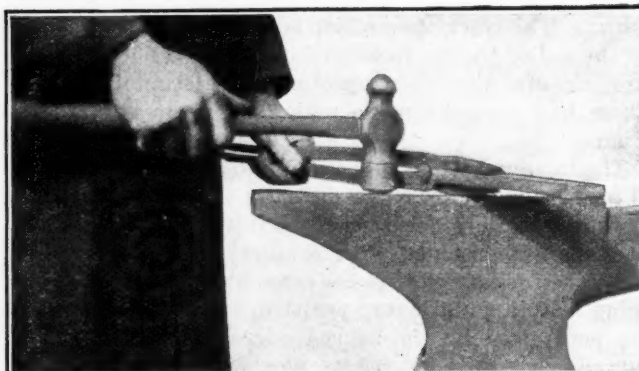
FORGING THE HANDLES FOR READY HOLDING
